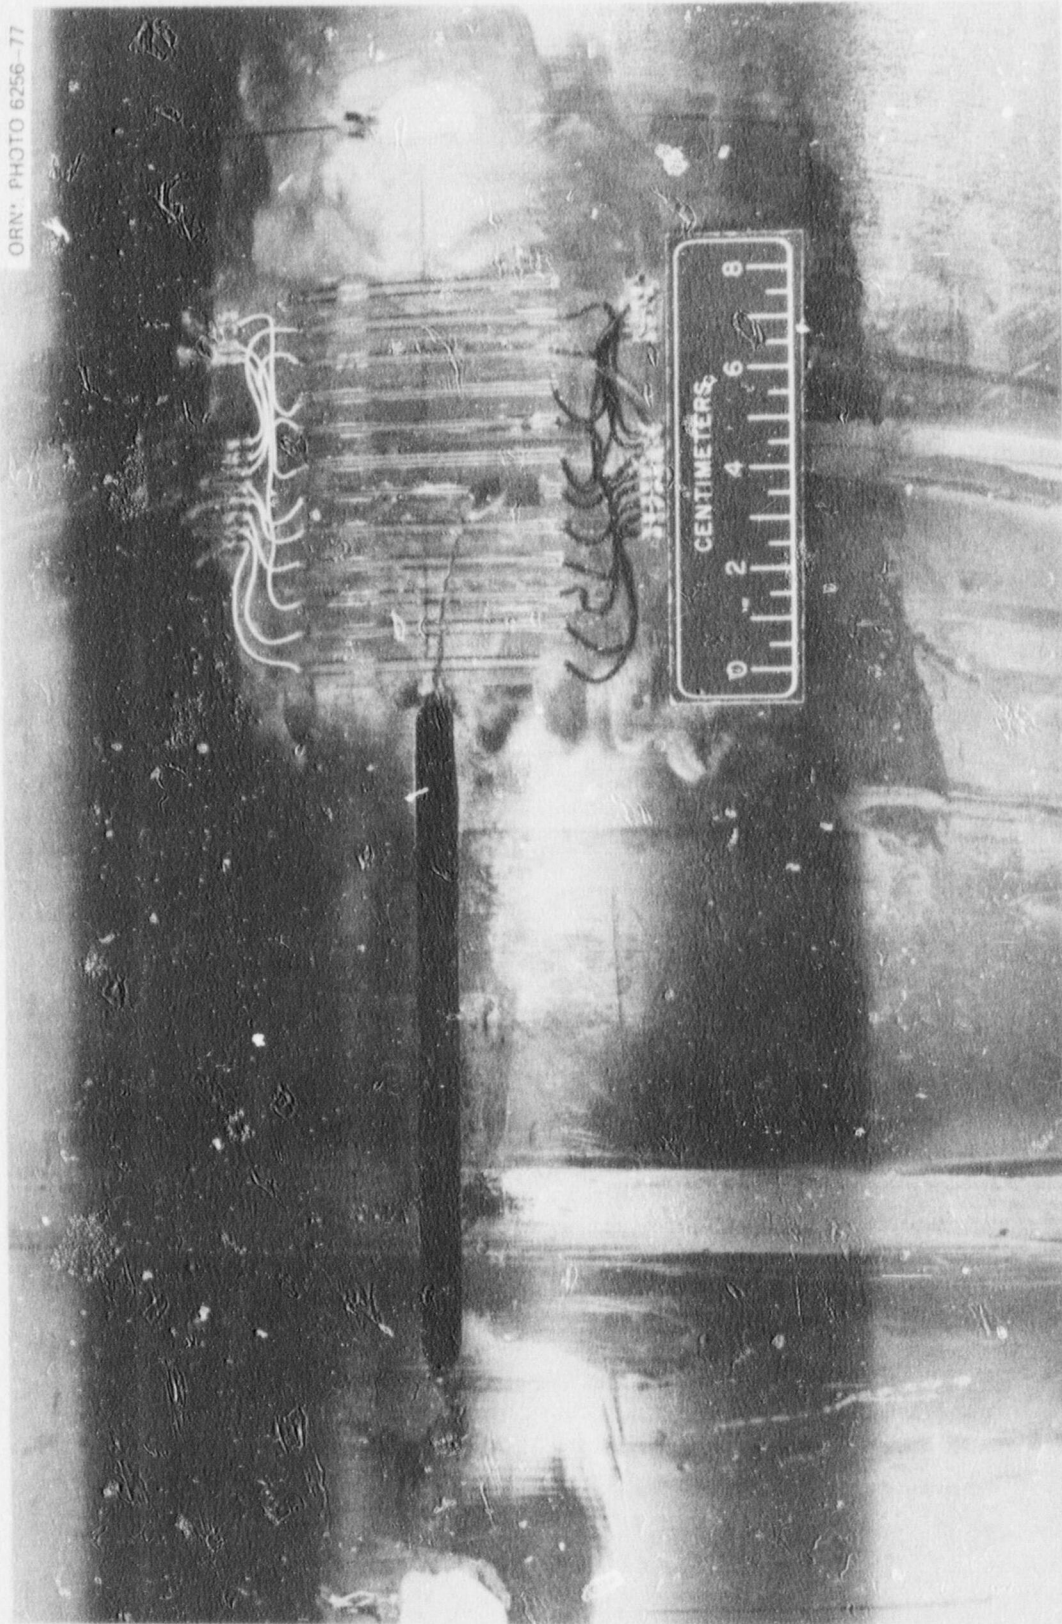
View of ladder gage after the first model test (1 cm = 0.394 in.).
